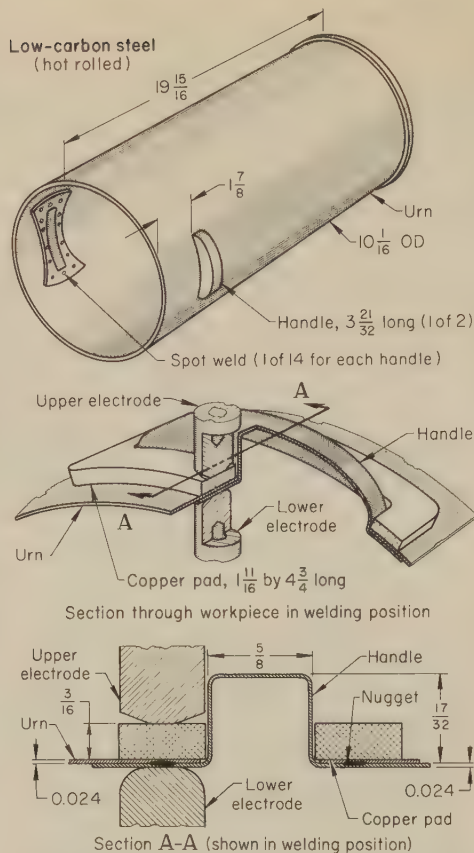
Sand urn on which electrode indentations on exterior surface were avoided by using a copper pad to diffuse force of upper electrode in spot welding of handles (Example 375)
